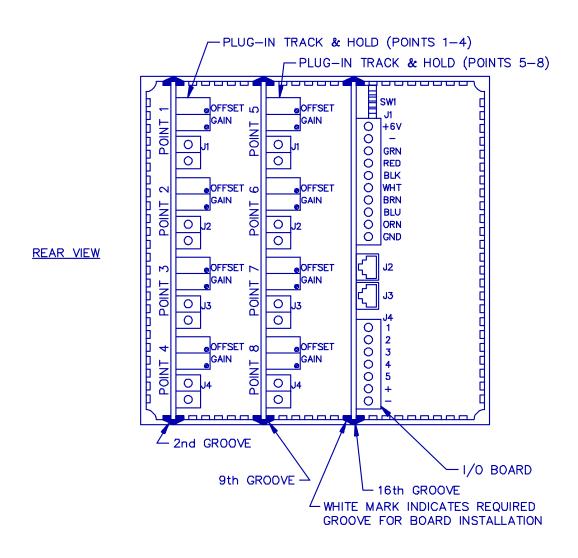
Sample Sequencer Assembly with Plug-in Track & Hold
